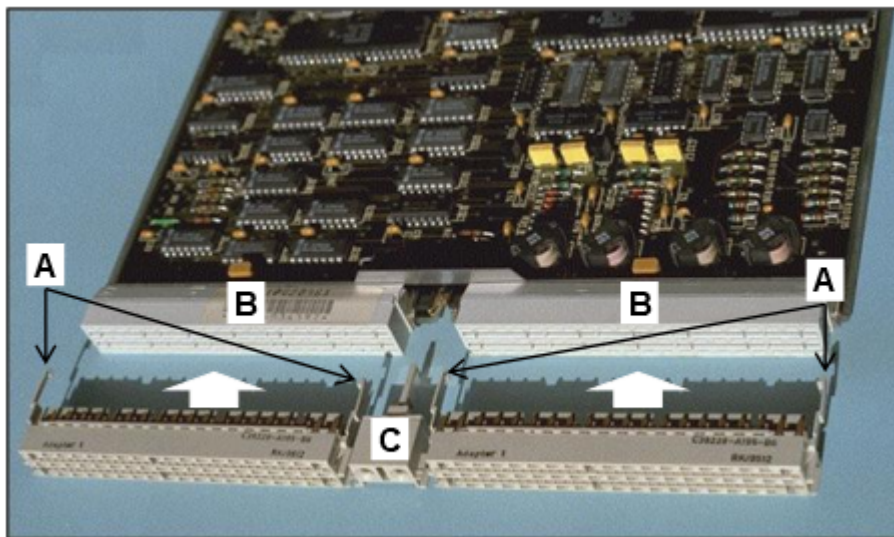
Installing the SIVAPAC-SIPAC Board Adapter
